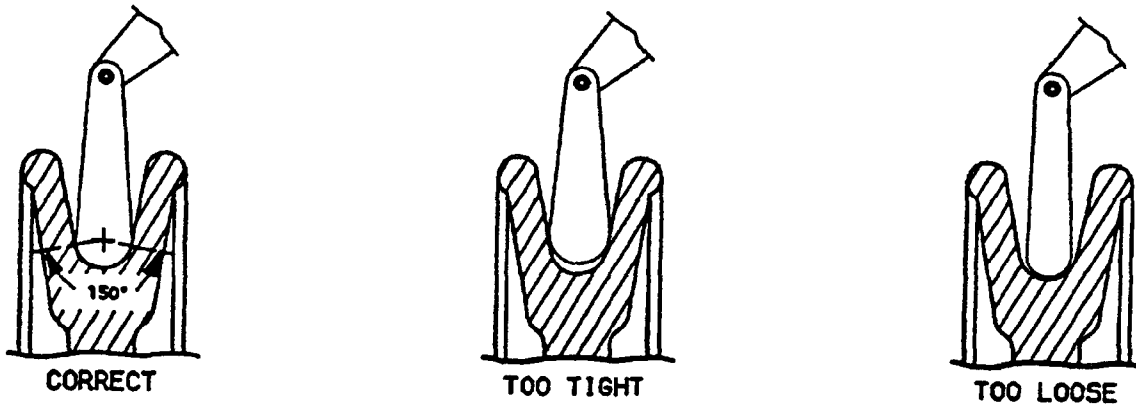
Cross-section sketches illustrating three sheave-groove conditions.
